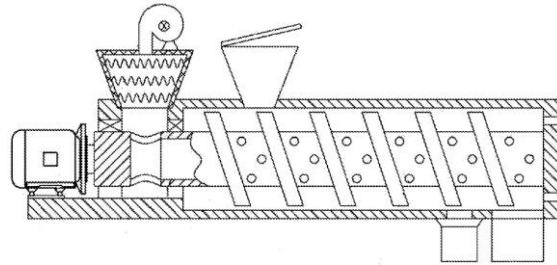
Press with heating of oil raw materials with heated air through a hollow screw (Patent No. CN211105796U)
